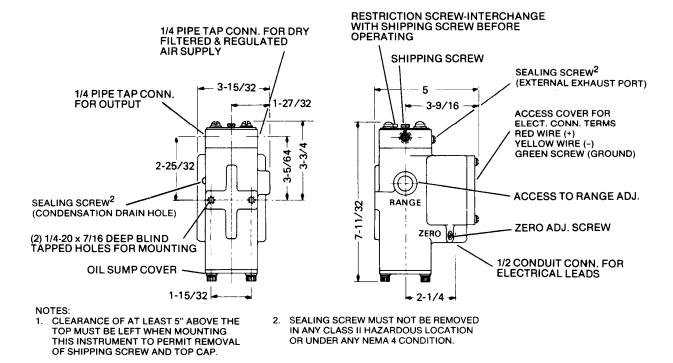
Transducer Installation and Mounting Dimensions
